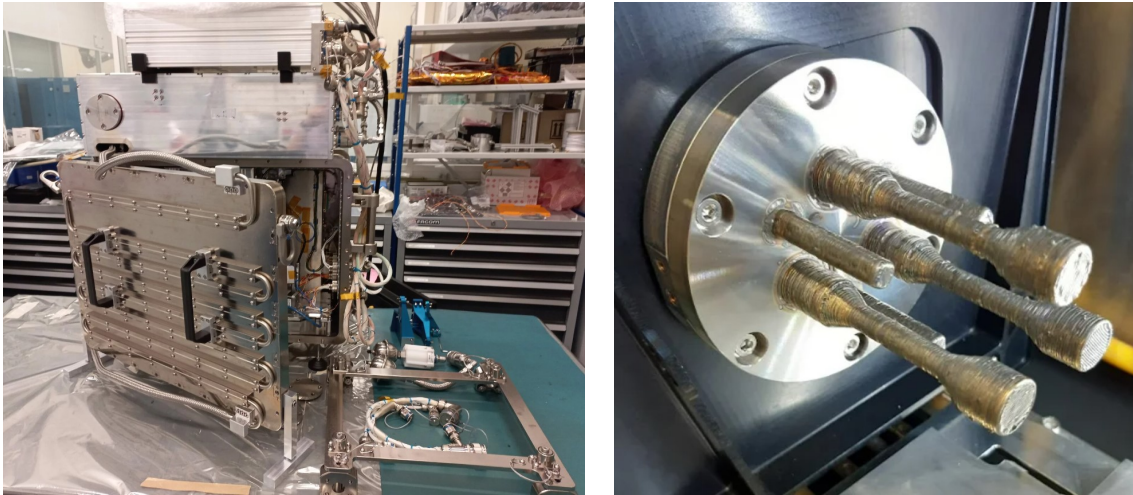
The first metal 3D printer for space (left) and four metal 3D specimens to be printed on board the ISS (right)^[20]
